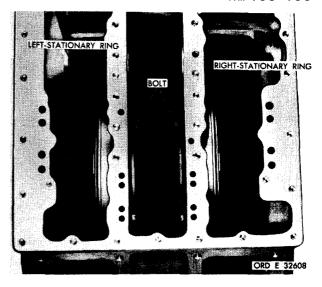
Top view of transmission rear housing, showing bolts which retain brake apply cam stationary rings
